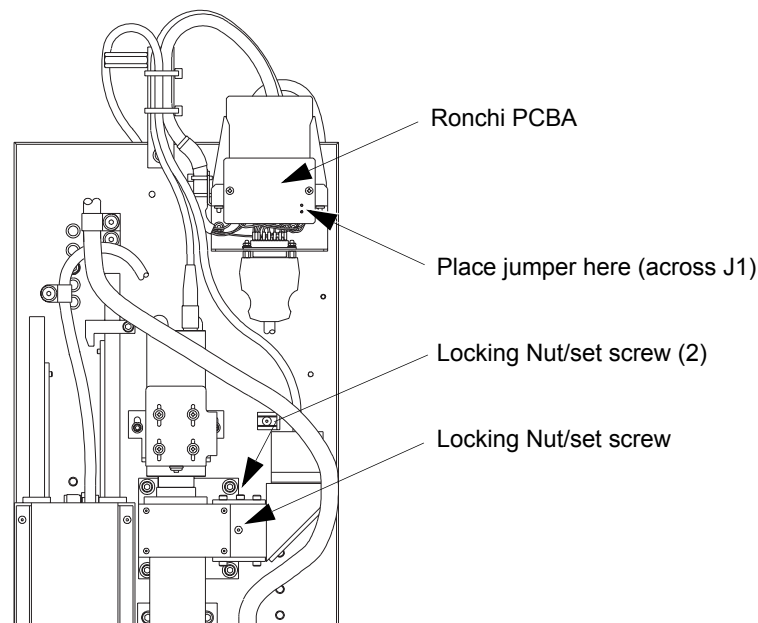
Location of the Ronchi Alignment Nut and Screw Assemblies
